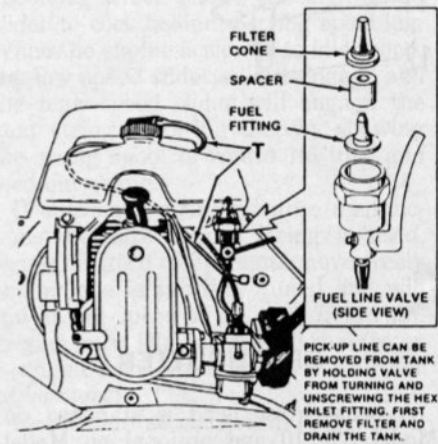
Drawing showing location of air pressure tube (T) to fuel tank. Fuel filter may be removed and cleaned.
